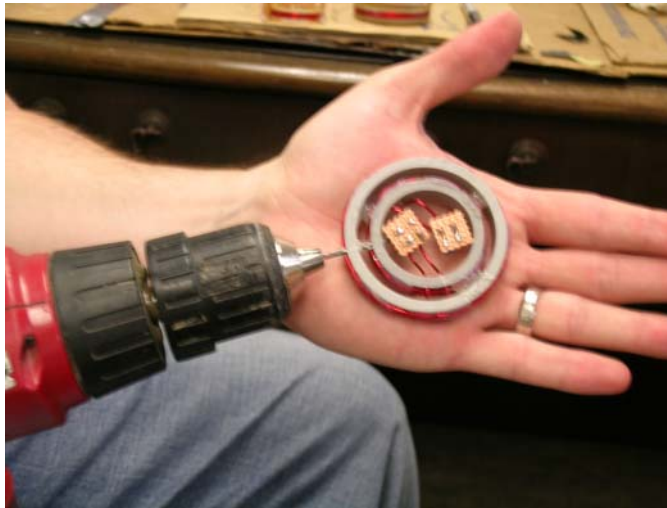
Inductor Wires of Sensing Circuit Ready for PC Component Board
